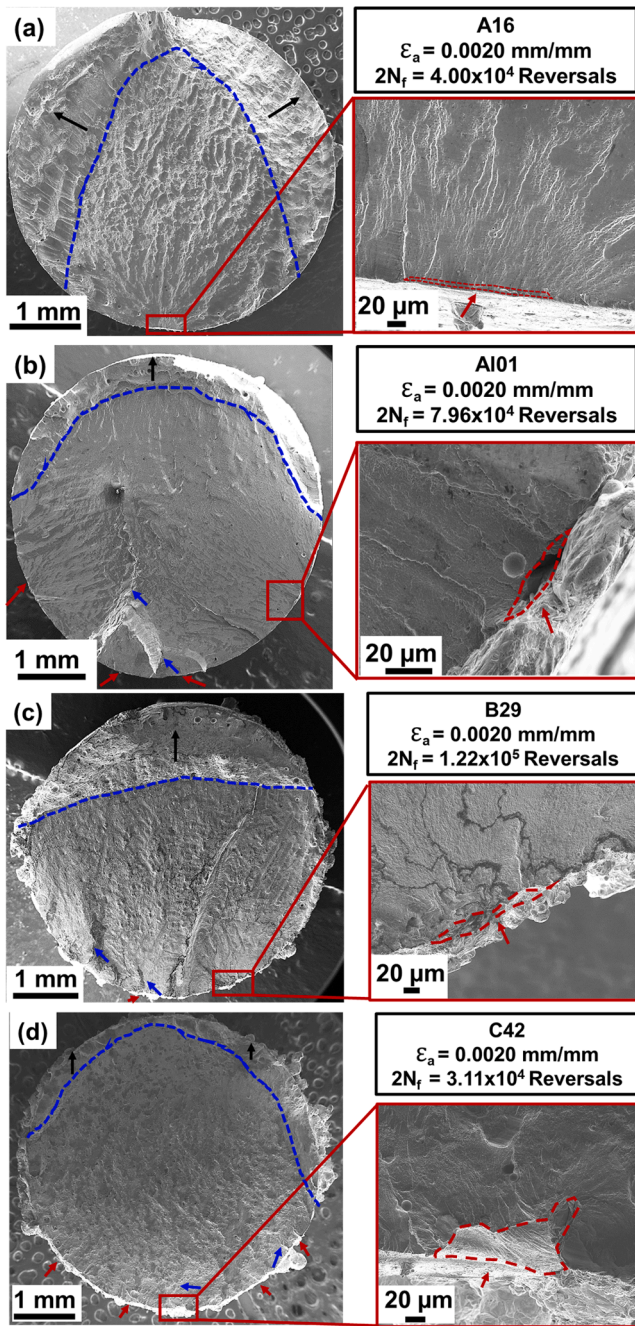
Fracture surfaces of specimens tested in as-built surface condition at 0.0020 mm/mm strain amplitude: (a) LPW AlSi10Mg, (b) EOS AlSi10Mg, (c) Scalmalloy, and (d) QuesTek Al. The red, blue, and black arrows are indicating crack initiations, the coalescence of fatigue cracks after initial growth, and the final fracture area, respectively. (For interpretation of the references to colour in this figure legend, the reader is referred to the web version of this article.)
